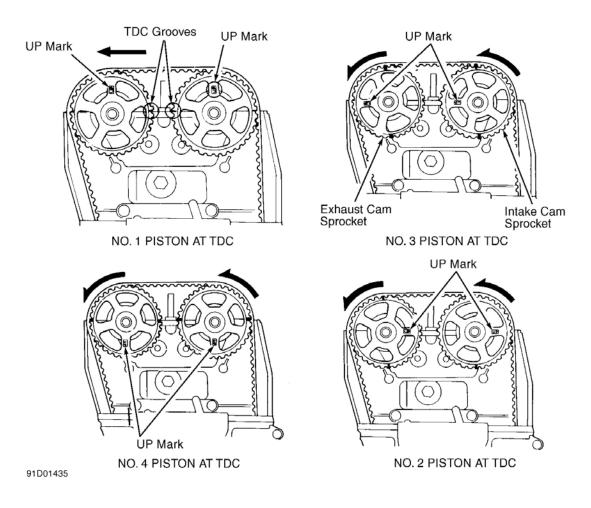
Positioning Camshaft Sprockets for Valve Adjustment (Prelude 2.3L DOHC) Courtesy of AMERICAN HONDA MOTOR CO., INC.
